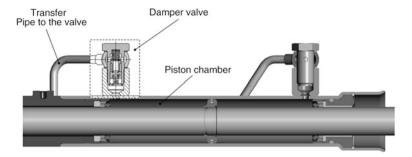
Cylinder with hydraulic connections and damping valve
